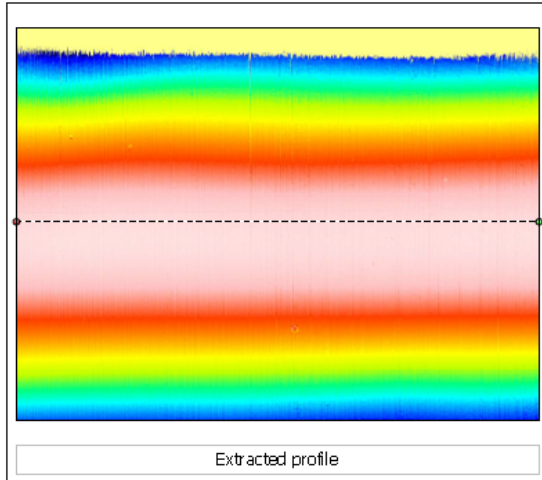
Surface roughness respond to Ti with 2-step polished using Geared Head Milling & Drilling machine generated by Leica
